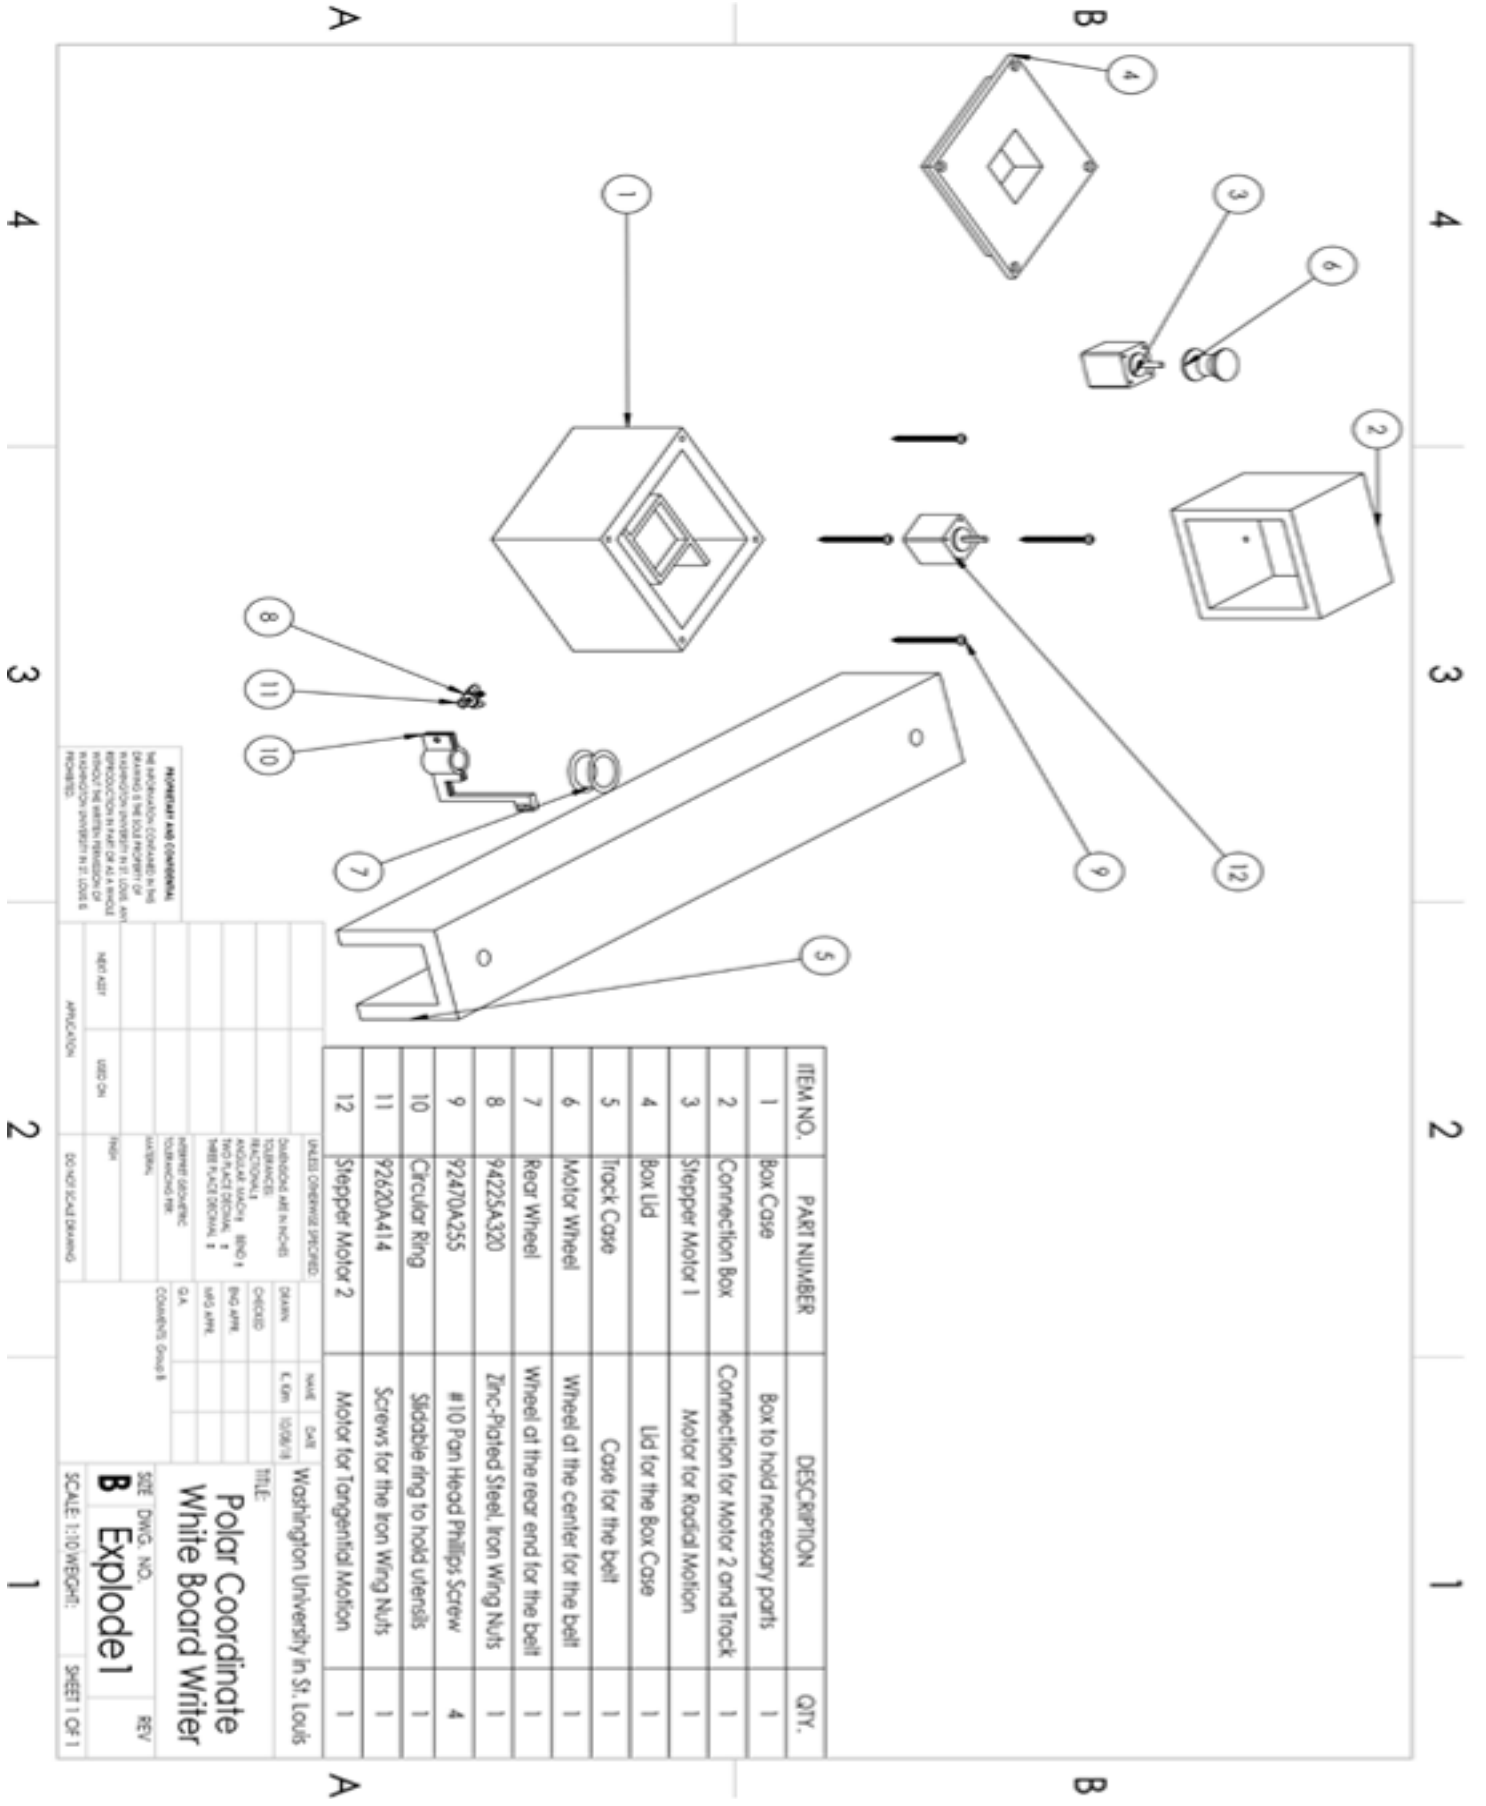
Exploded view of CAD embodiment of White Board writer with balloon callout
